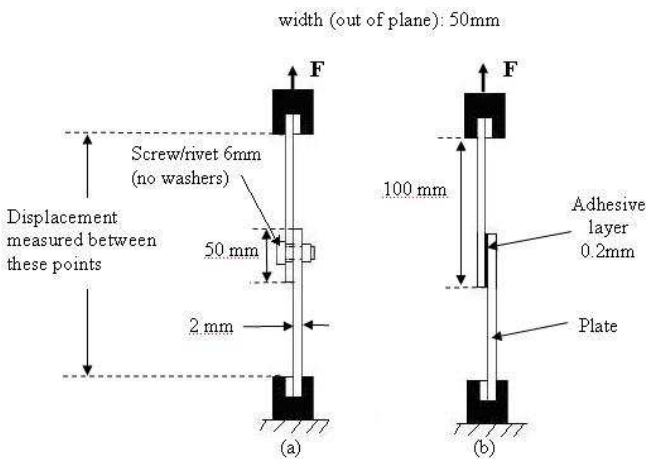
Shear configuration, (a): screwed or riveted joint, (b): bonded joint
